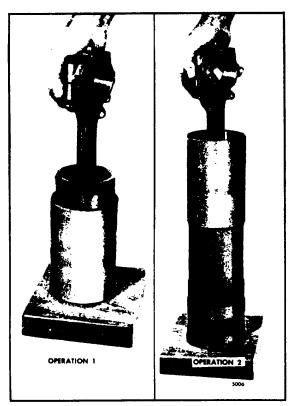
Installing Piston and Connecting Rod Assembly in Ring Compressor and Cylinder Liner
